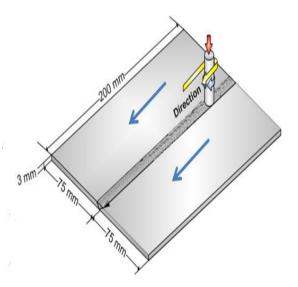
FSP process for 6061 – T6 plates FSW & FSP is done following the conditions that are shown in Table 4.
